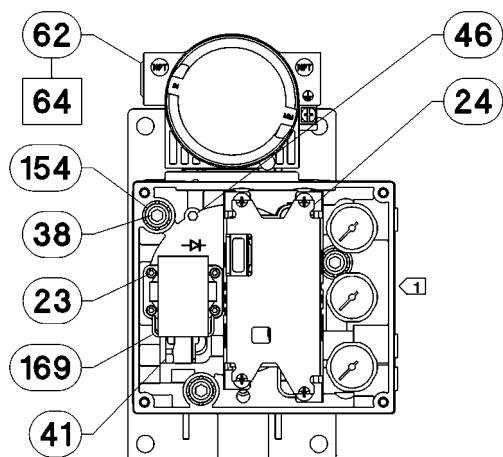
Type DVC6015 Digital Valve Controller Assembly
